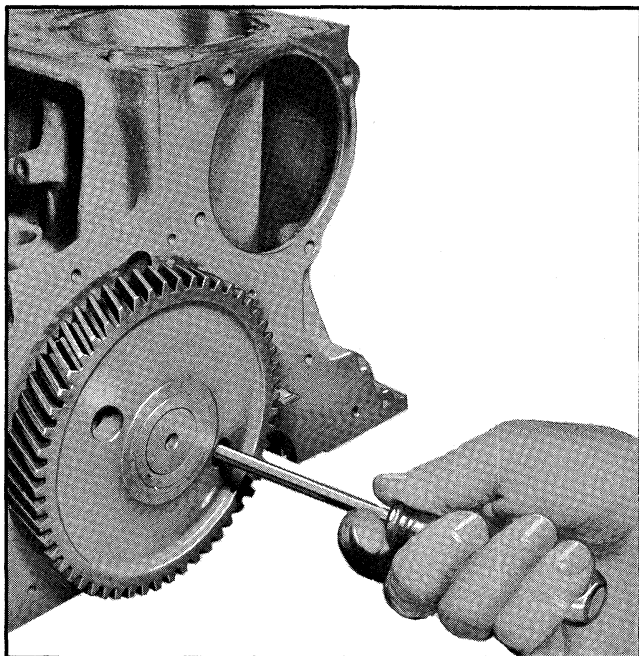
Removing Camshaft Thrust Plate Screws
